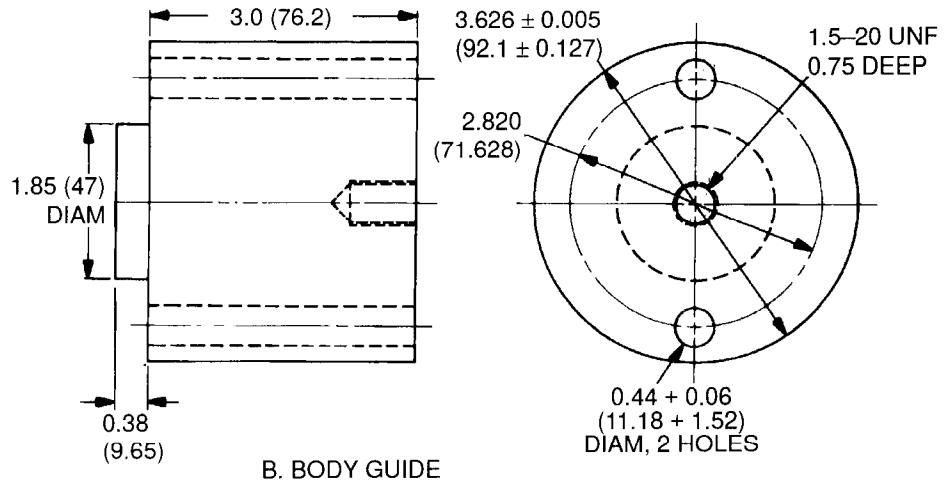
Guide Tool Assembly (Sheet 1 of 3)
